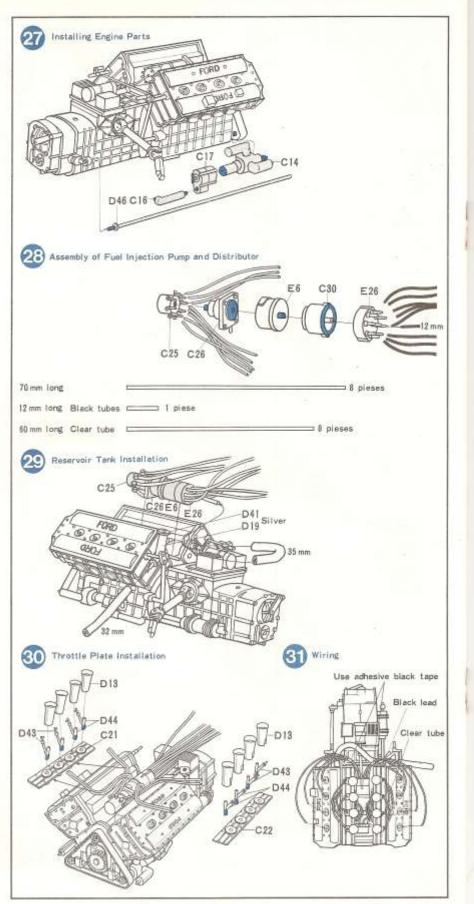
Throttle Plate Installation Cement the throttle plates C21 and 22 to the engine by aligning the clear tubes positioned as illustrated. Cement D 43 and D 44 to C21 and C 22 as shown. Then cement the air intake D 18.
